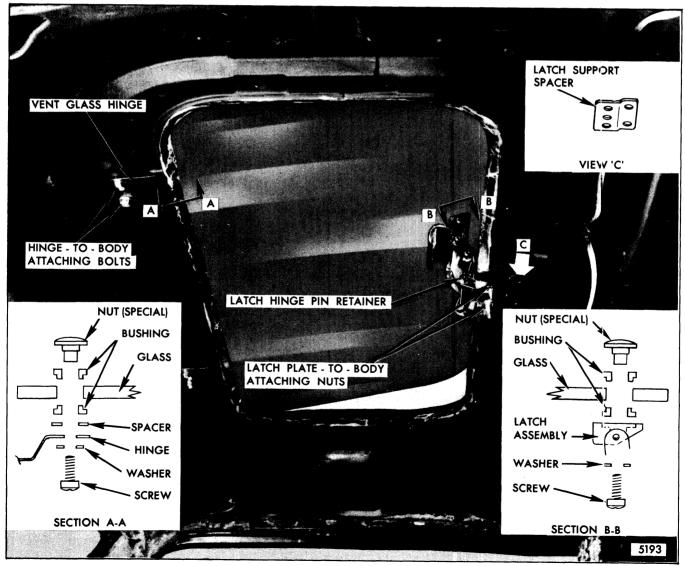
Vista Vent Hardware (Headlining Removed for Illustrative Purpose Only)
